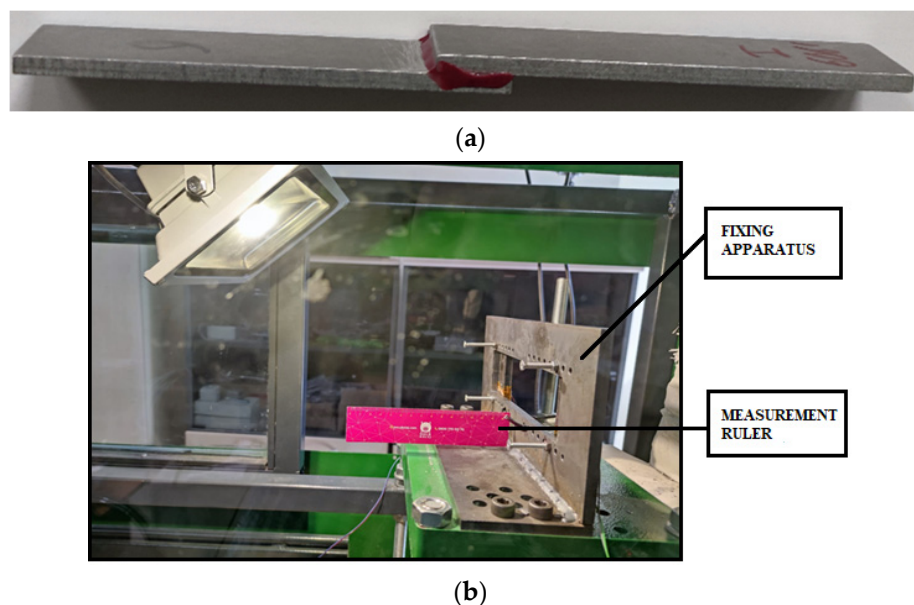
The produced single-lap joints (with 15 mm *OL*) used in the tests (a), the apparatus in which the specimens are fixed in a clamp-clamp configuration and the measurement ruler fixed before the test (b).
